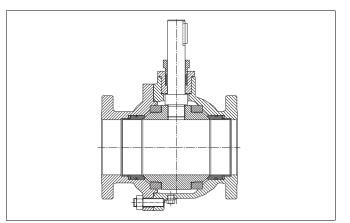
Construction, sizes DN 250/10" to DN 600/24", trunnion mounted ball
